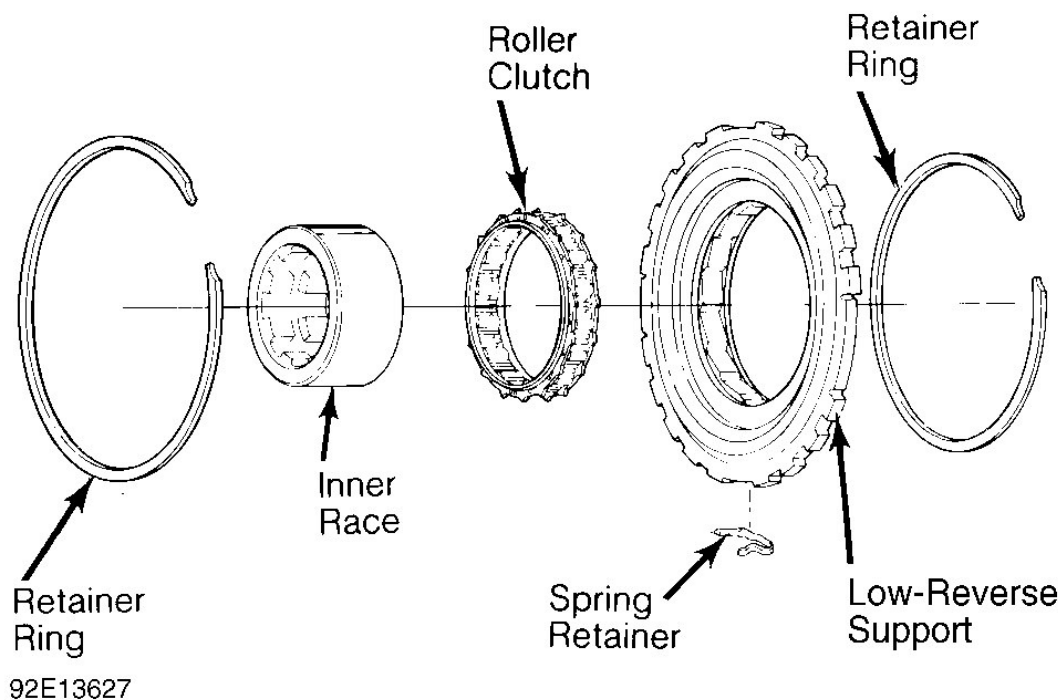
Exploded View of Low-Reverse Clutch Assembly
